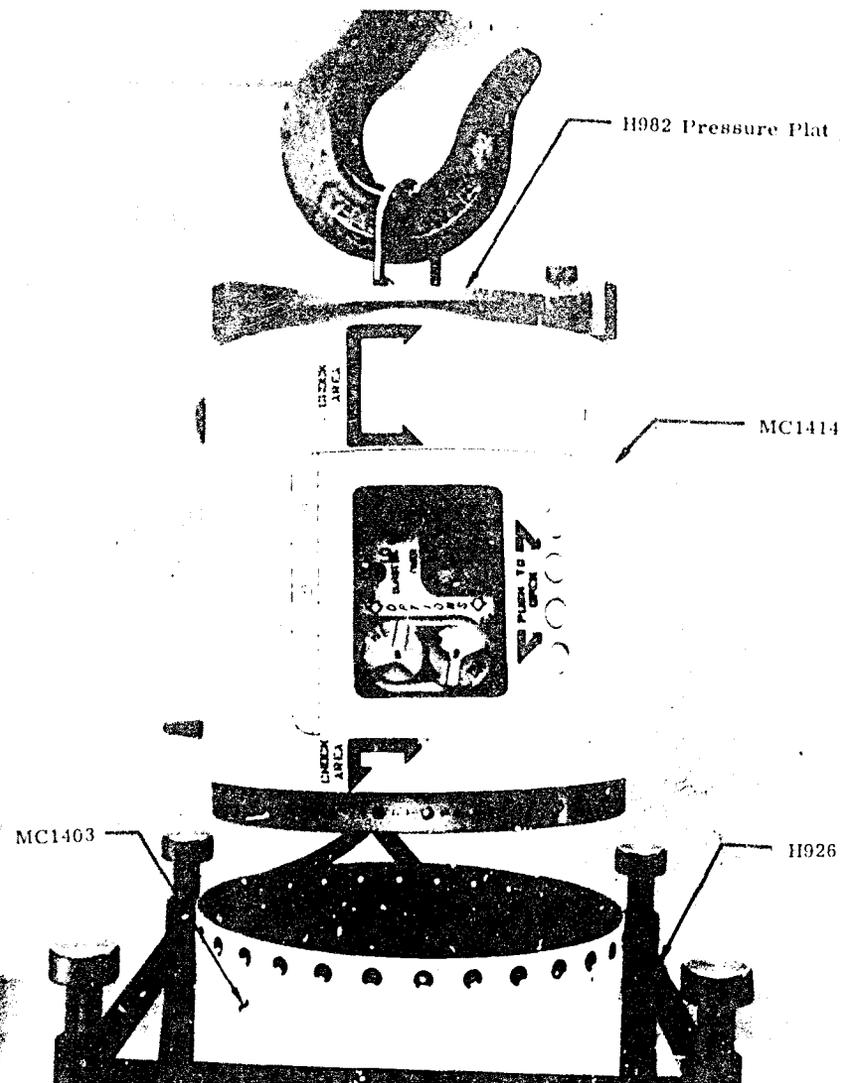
The H982 Pressure Plate and MC1414 Being Removed From the TX-57 Weapon by an Overhead Crane
